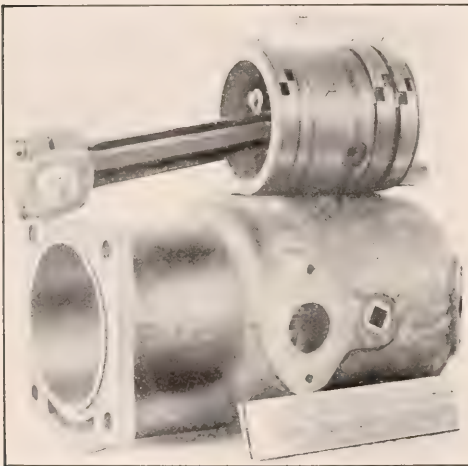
A* is piston head; *B*, the piston rings which by their springiness maintain gas-tight contact between piston and walls of cylinder. *C* is piston rod; *D*, cylinder. These pieces are finished ready for putting together. The rule is to show comparative size.
